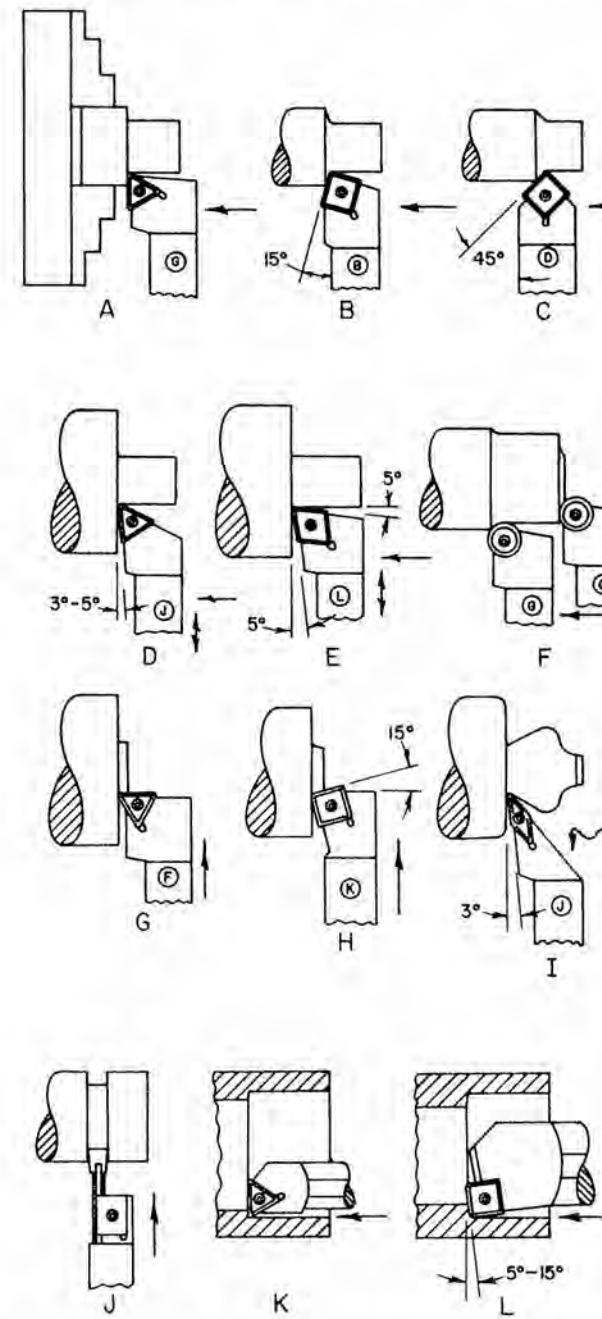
Typical tool shapes and applications for cemented-carbide, indexable-insert cutting tools. Encircled letters are the standard toolholder designations.
